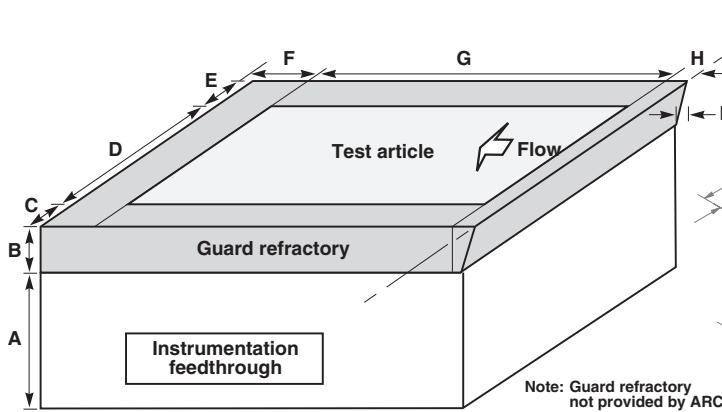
Test fixture assembly for PTF and IHF (semielliptical nozzle) (dimensions are in table 4)
